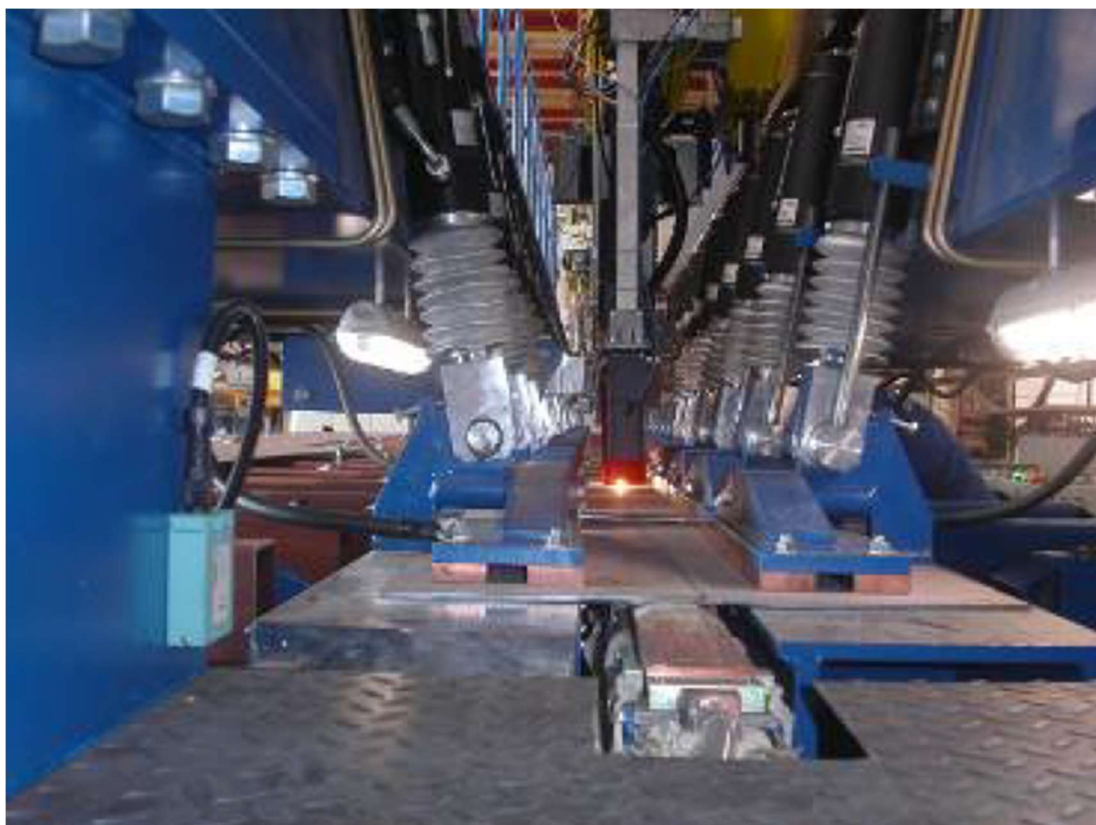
An example of groove restraint device for butt welded joints installed in laser-arc hybrid welding system. : Photo by IPG Photonics (Japan) Ltd.
